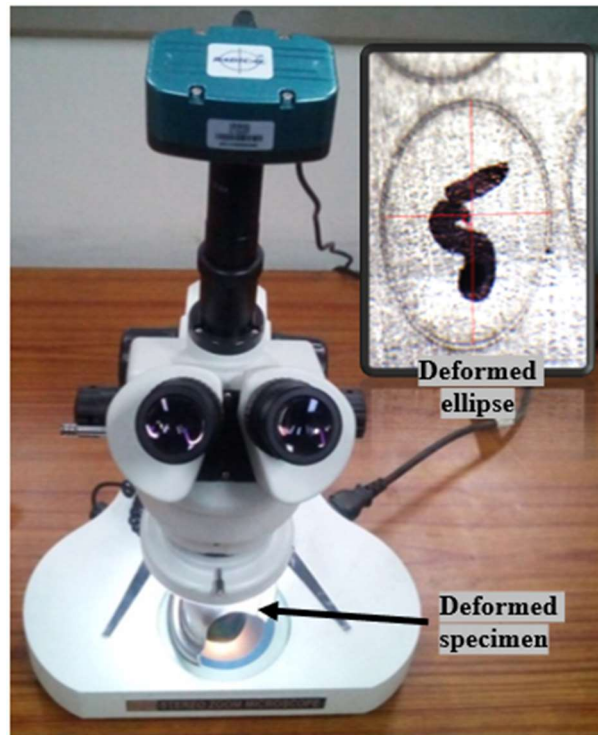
Measurement of strains using stereo zoom microscope on a deformed specimen
